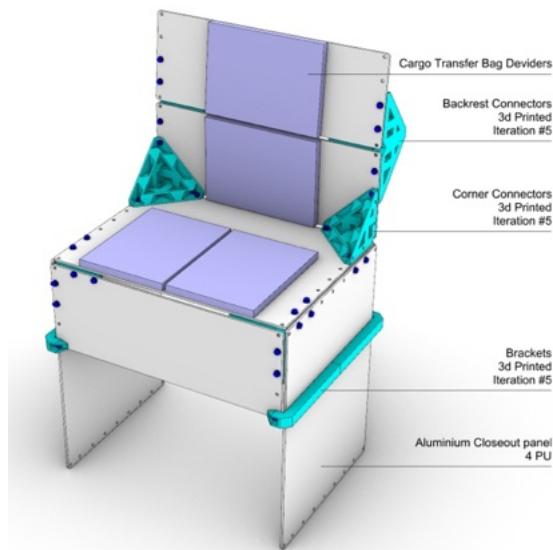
CAD drawing of developed chair (type: one). [Source: LSG]
